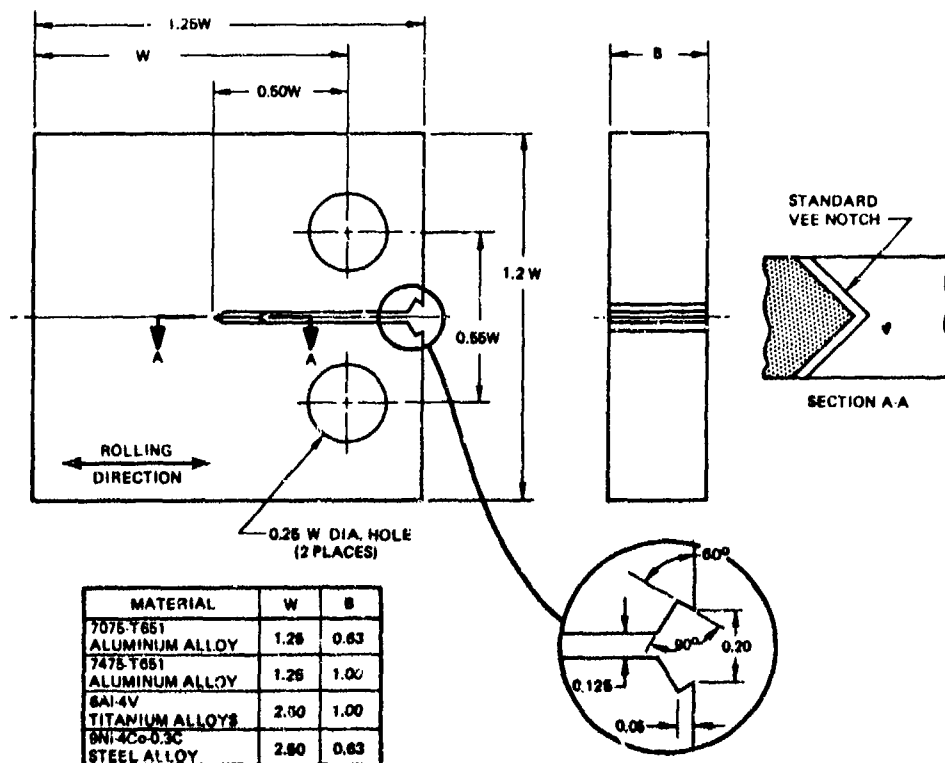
Compact Tension Specimen Configuration Used For Static Fracture Testing
